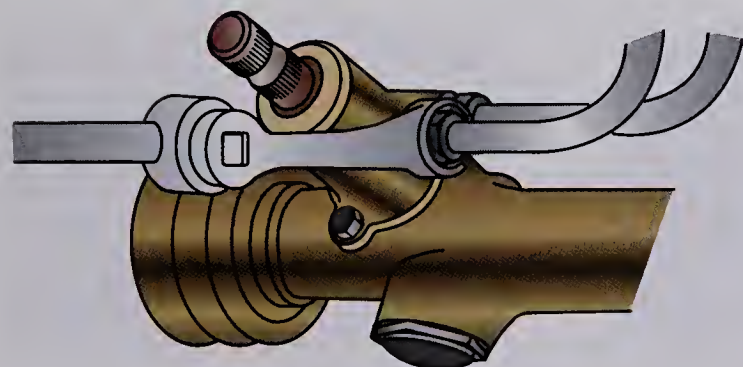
Removing high-pressure and return hoses from steering gear.
